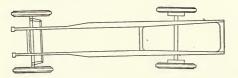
Rear Axle out of Alignment due to Poor Chain Adjustment.
